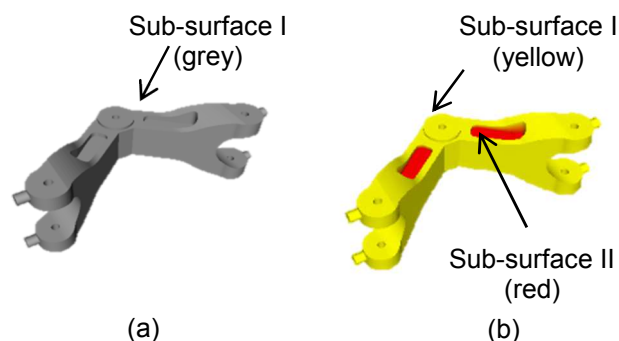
Prismatic components (industrial parts) (a) Multi-surface part (b) Single surface part
